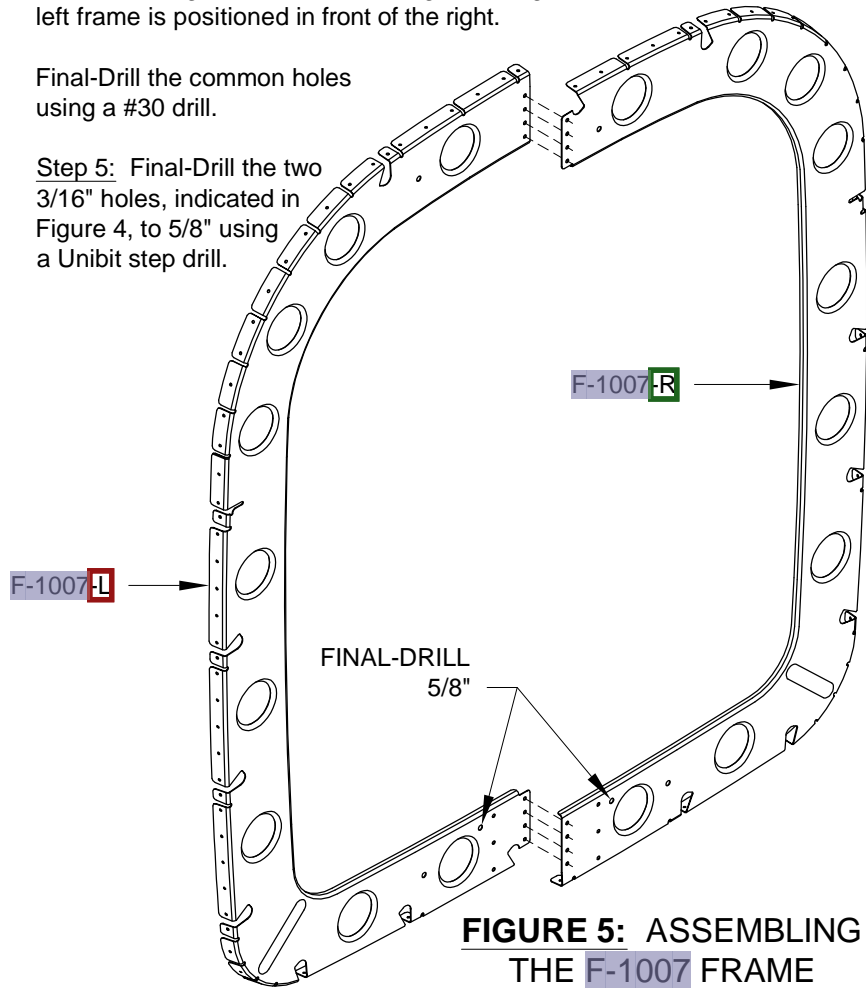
ASSEMBLING THE F-1007 FRAME
